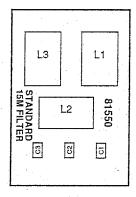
81550 15M INPUT FILTER BOARD COMPONENT LAYOUT
